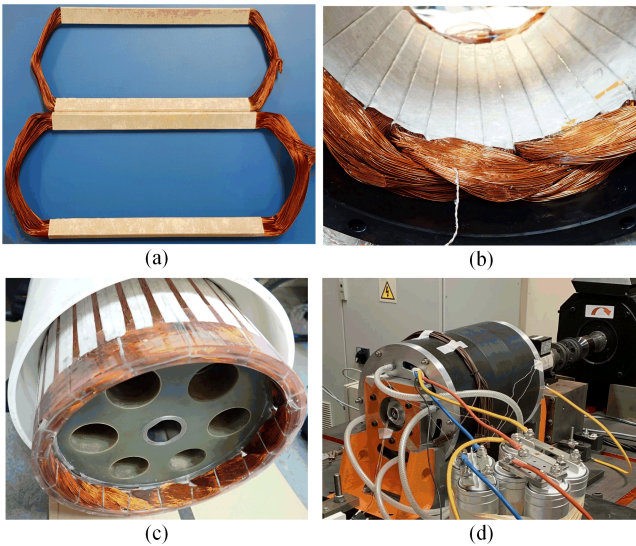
Photos of the ACRIM prototype (a) pre-formed rotor coil (top) and stator coil (bottom) before mounting on the machine; (b) stator housing and coils; (c) rotor hub and coils; (d) assembled ACRIM prototype with capacitors.
